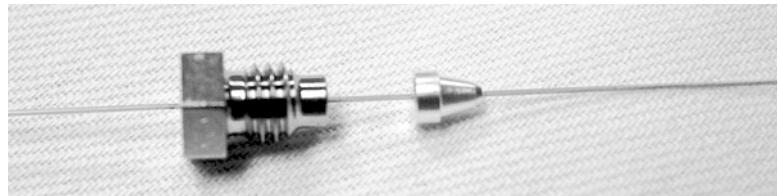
Thread the internal nut and ferrule into the swaging nut
